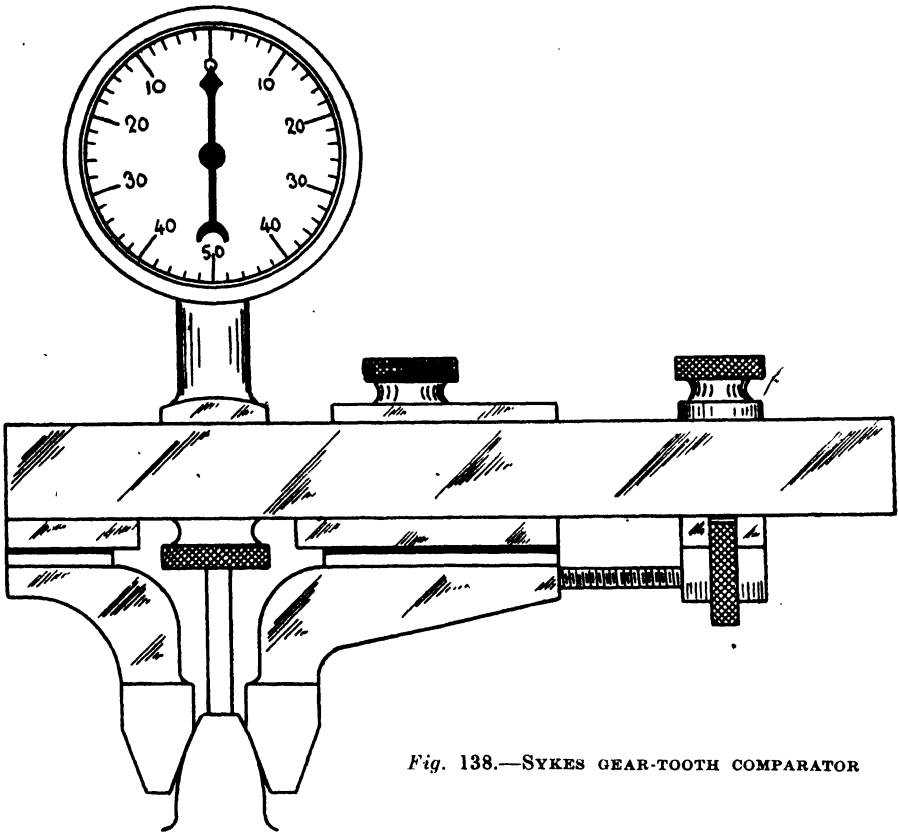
SYKES GEAR-TOOTH COMPARATOR
